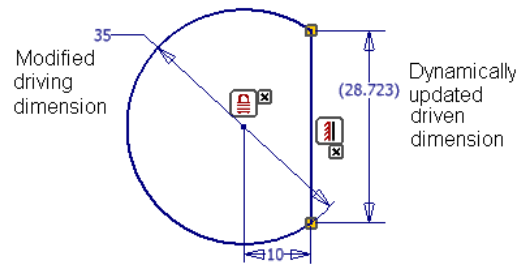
Modified driving dimension and dynamically updated driven dimension
